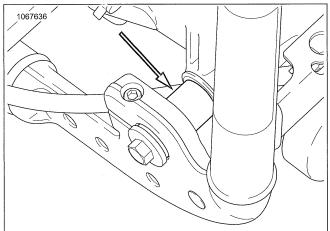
Spacer Installed Properly REMOVE AND INSTALL: UPPER FRONT ENGINE MOUNT
